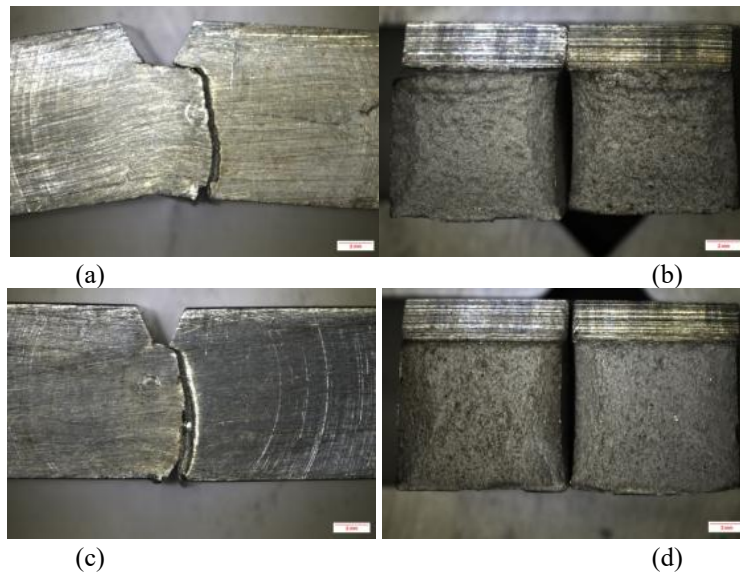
Fractographic appearance of the fracture surfaces of the impact specimens for alloy 2017, condition T451 (control sample, Z): (a) longitudinal section; (b) transverse section
